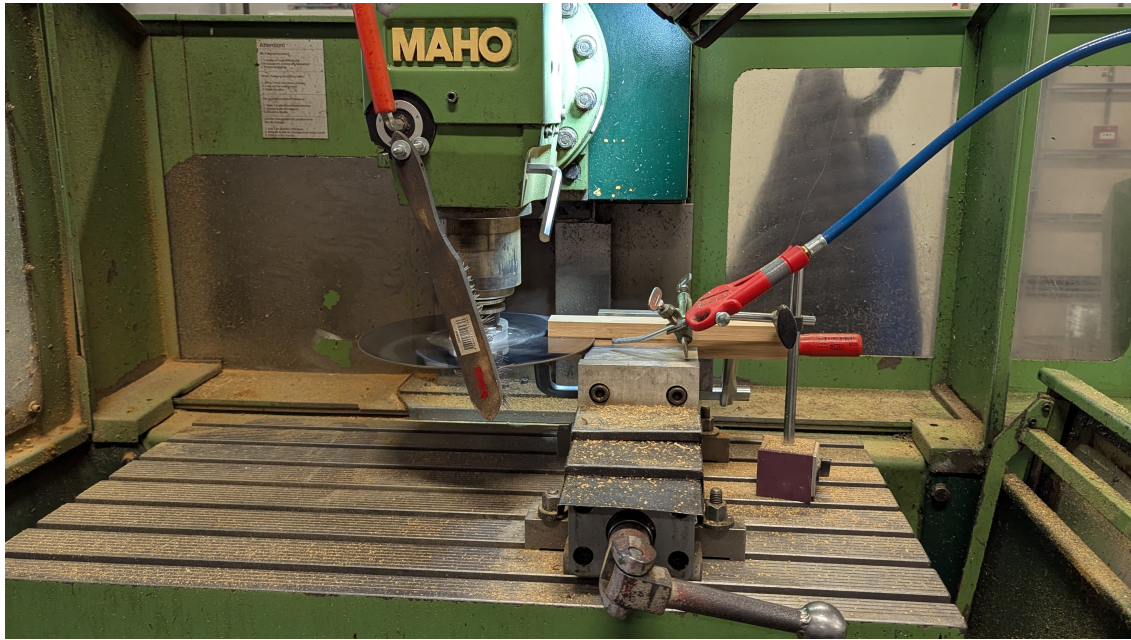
ENF specimen preparation. Mid-plane pre-crack notch cut on a MAHO milling machine with a circular saw blade, the specimen clamped horizontally on the bed.
